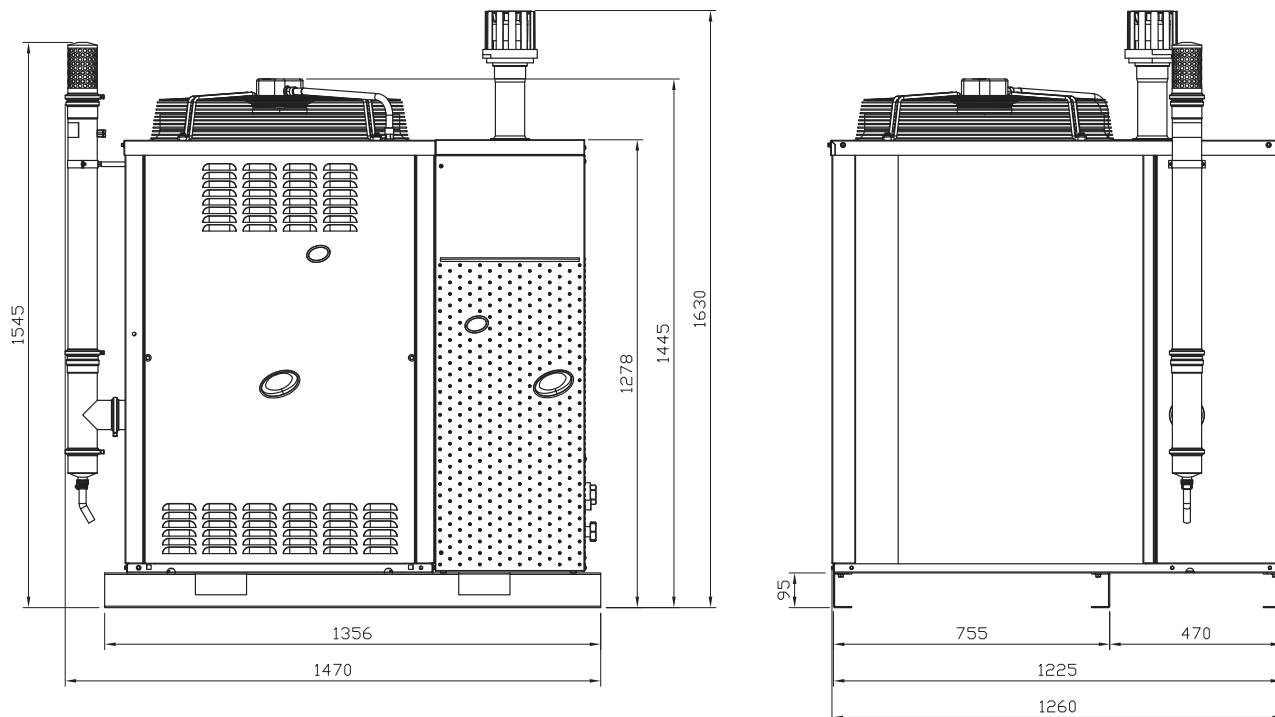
Dimensions (Silenced ventilation) - Front and side view (dimensions in mm)
